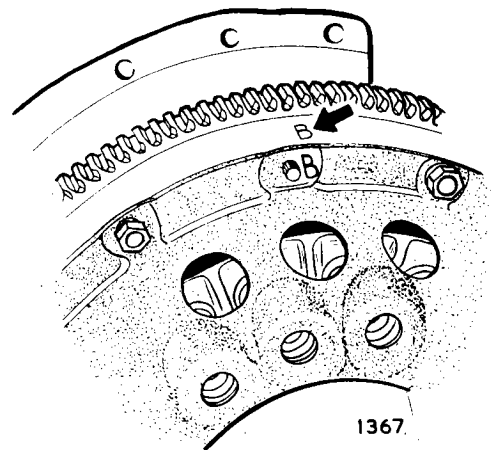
Showing the balance marks 'B' on the clutch and flywheel.
